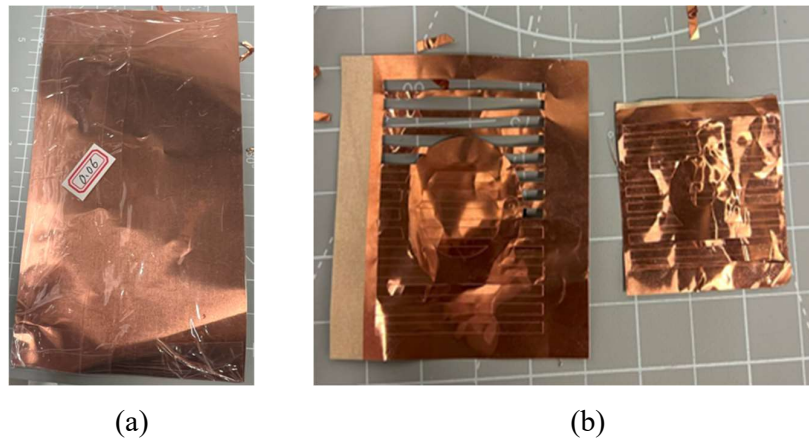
Copper Sheet (a) Before and (b) After Cut.
